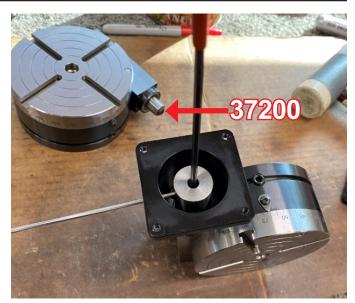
The arrow shows the location of the $10-32 \times 3/8$ " button head socket screw (P/N 37200). The 1/8" Allen wrench is inserted through the center hole of the coupling into the button head screw (P/N 37200).
